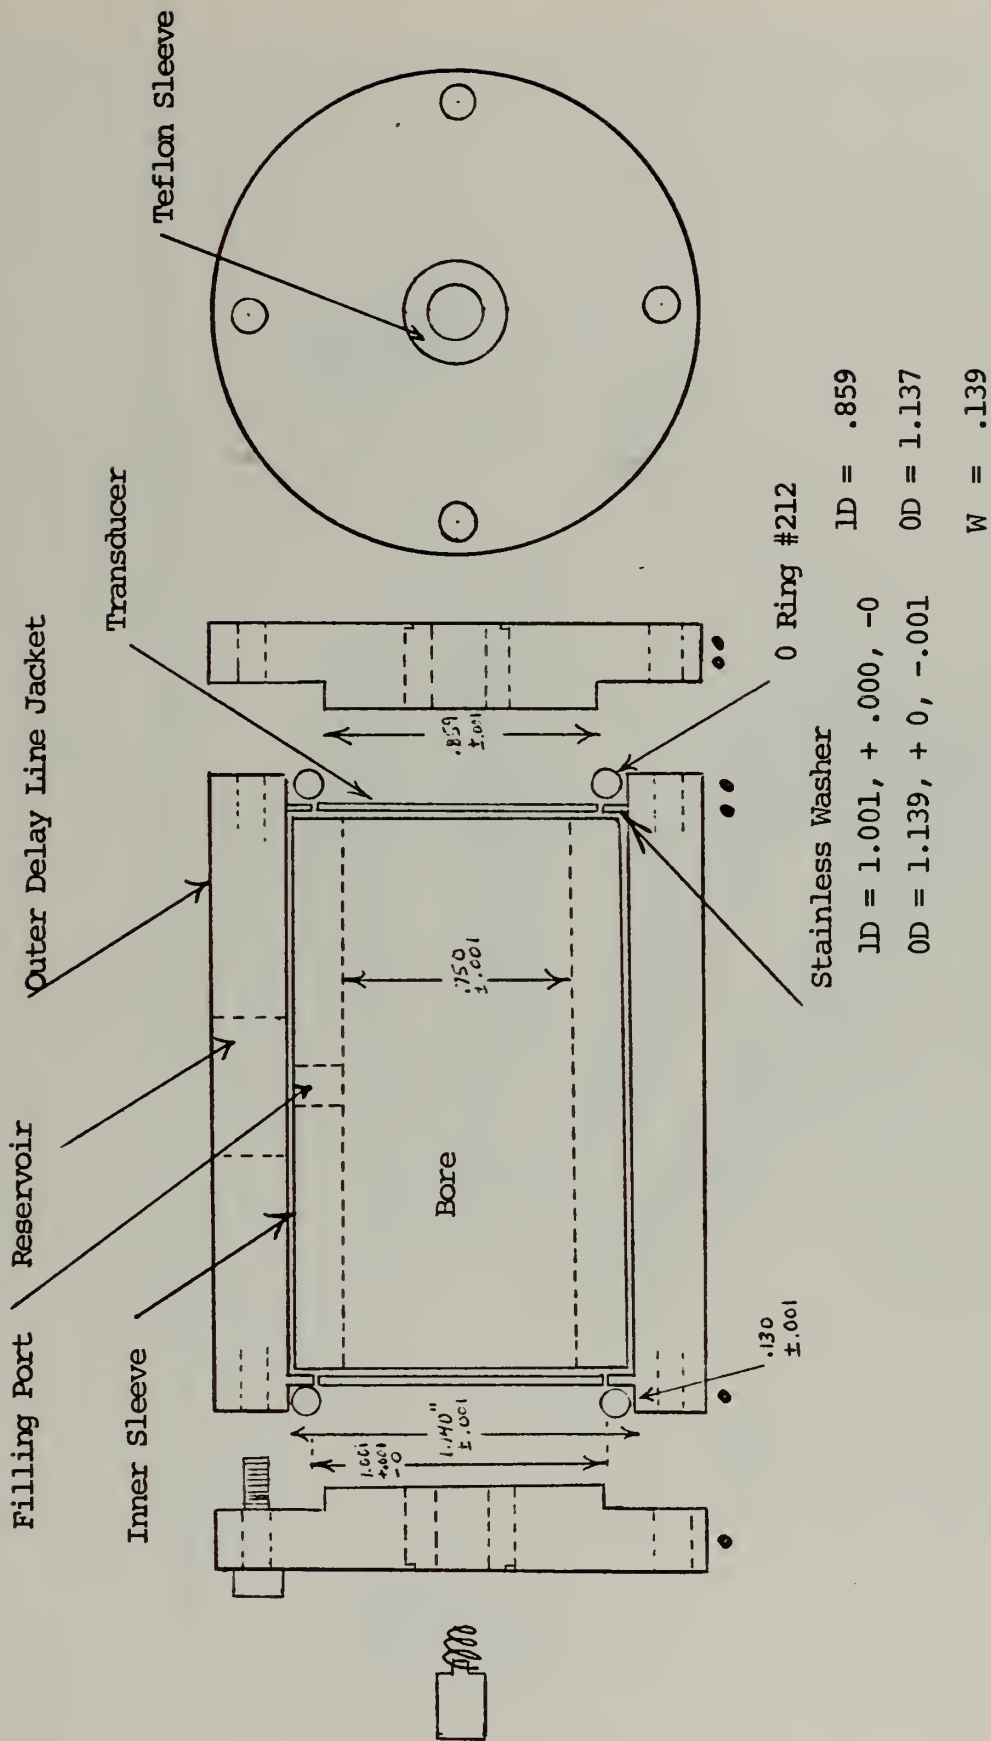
MARK II DELAY LINE ASSEMBLY
